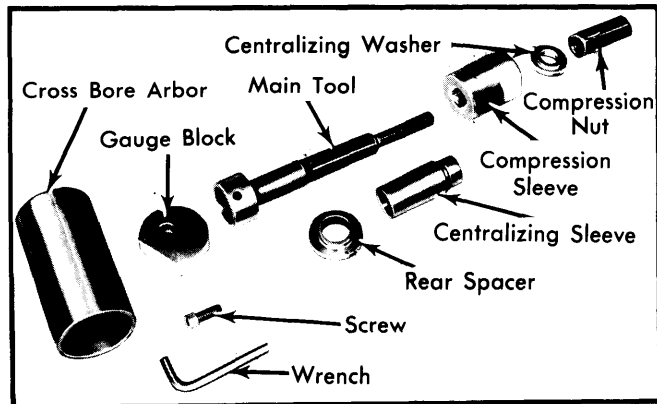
Chrysler Corp. Pinion Gauge Tool Set C-3715
